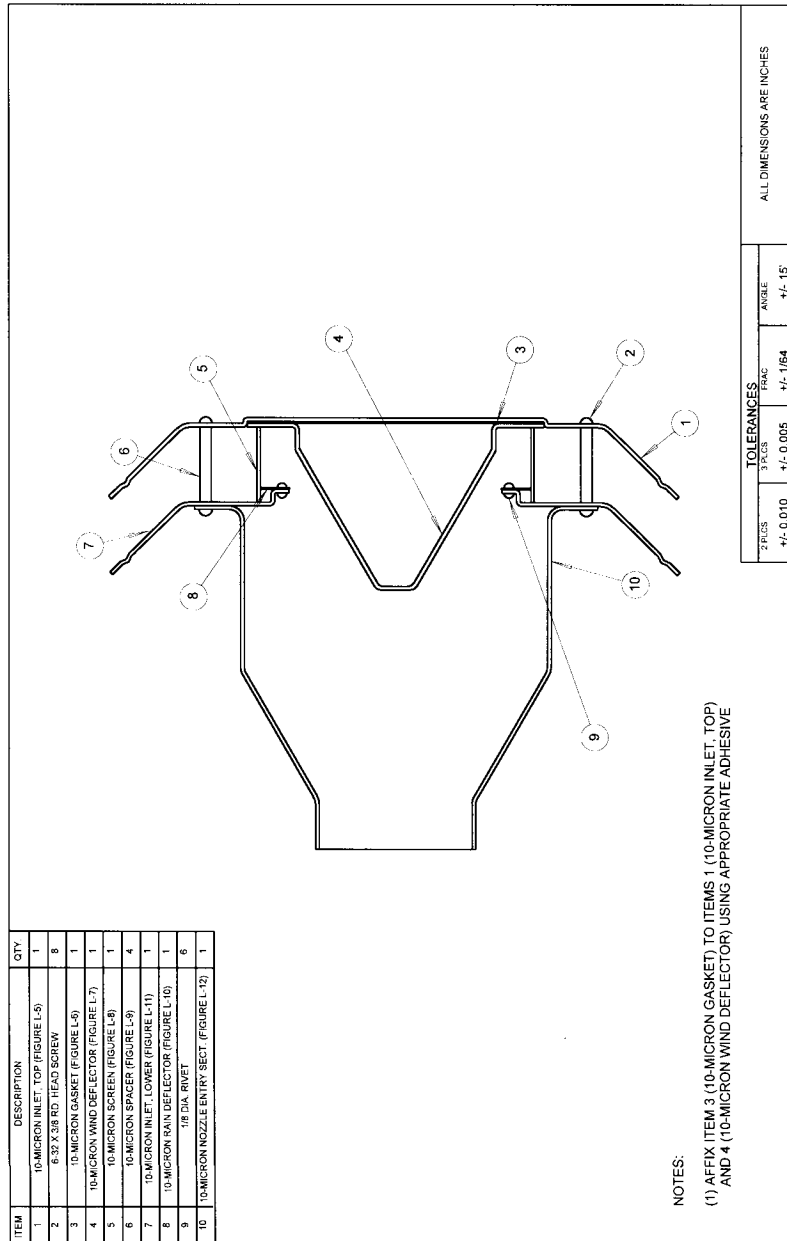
10-MICRON ASSEMBLY, LOWER SECTION
